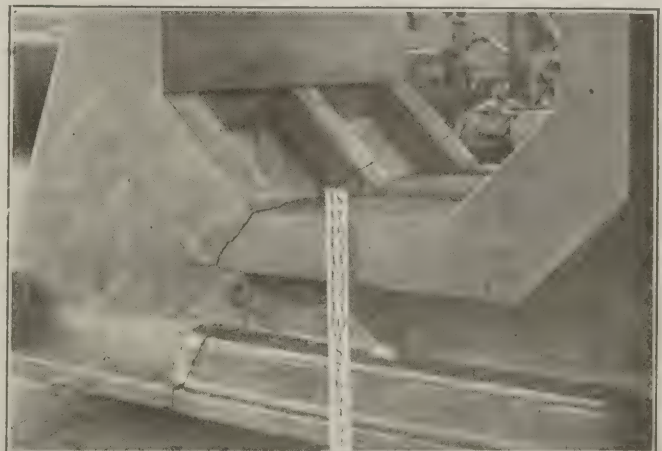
BADLY FRACTURED BEARING PEDESTAL
